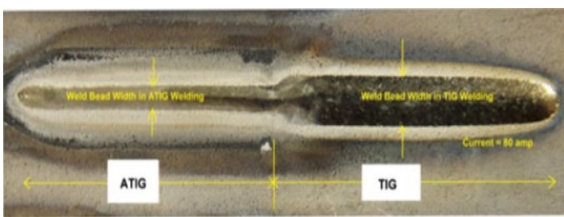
Top view of TIG and A-TIG weld bead obtained on a titanium plate(8).
